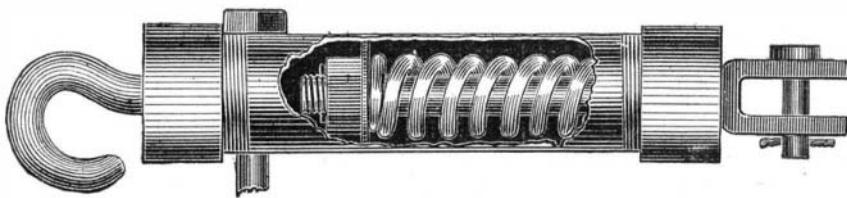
SMALLEY'S DRAUGHT TUG SPRINGS.
